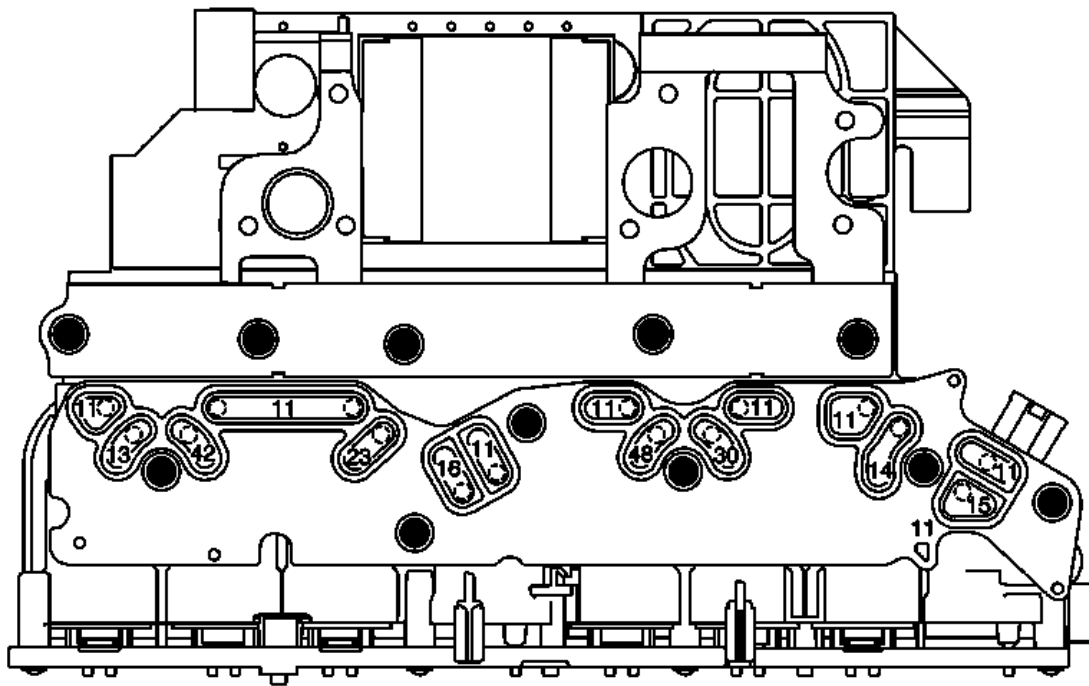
Control Solenoid Valve Assembly Components (w/Body and TCM)
